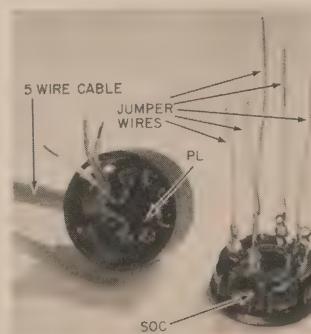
The socket adapter shown ready for final assembly. See text for details.
